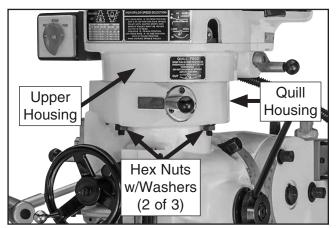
Location of hex nuts and washers that secure upper housing to quill housing.
